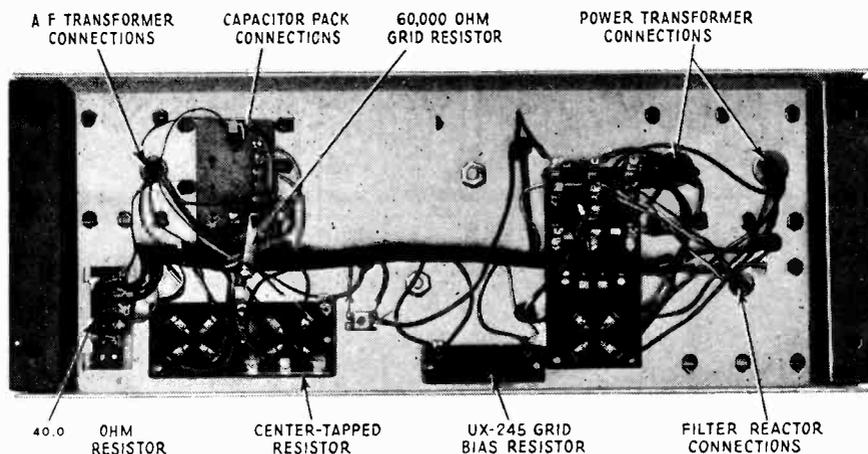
Sub-chassis view of the S.P. U.-Reproducer assembly
